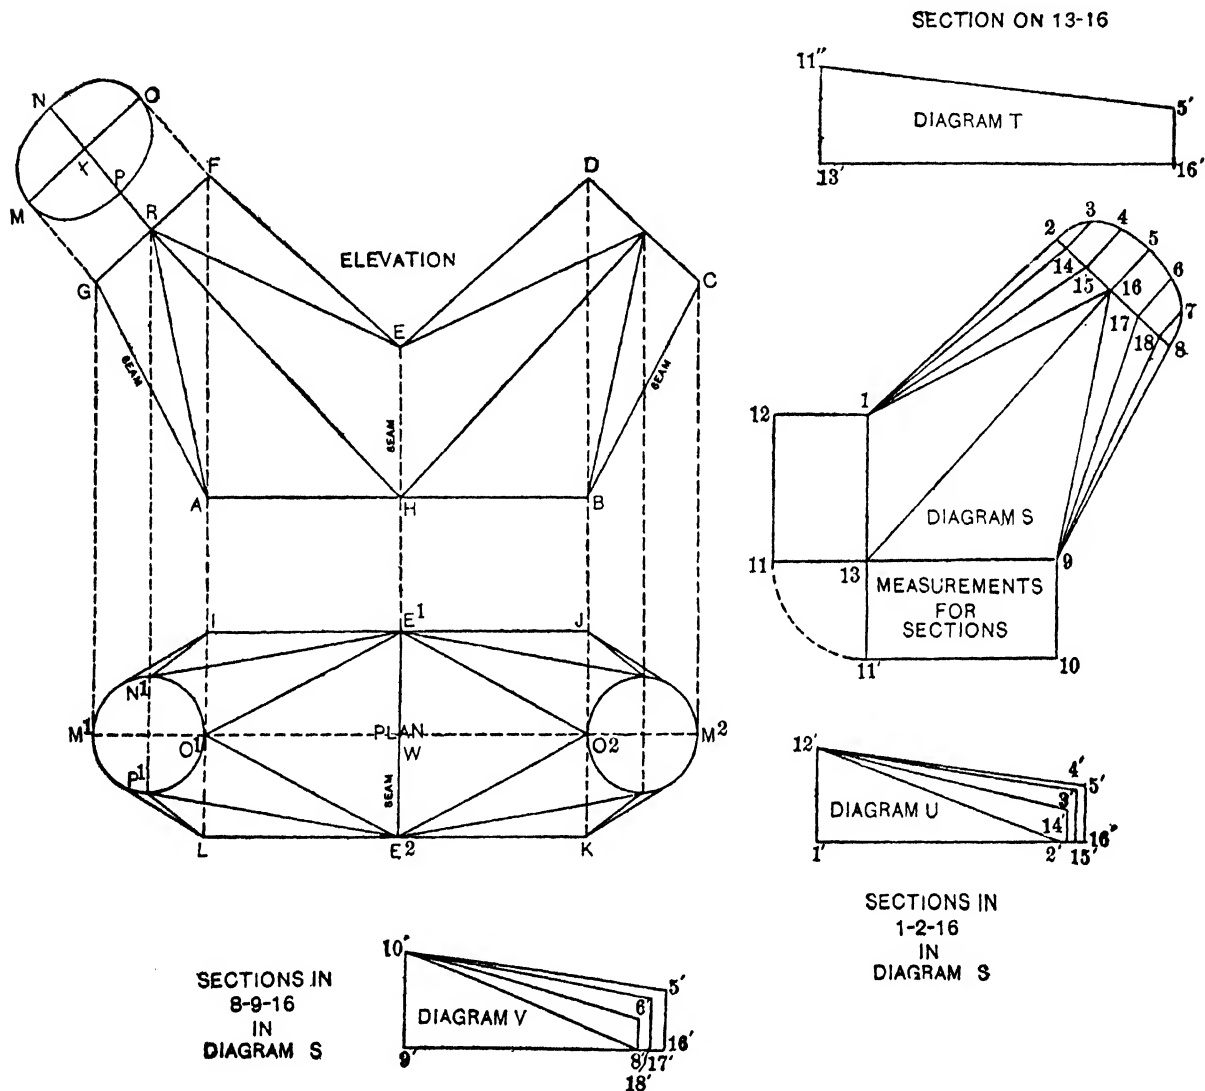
Plan, Elevation, Measurements for Sections and Diagrams
